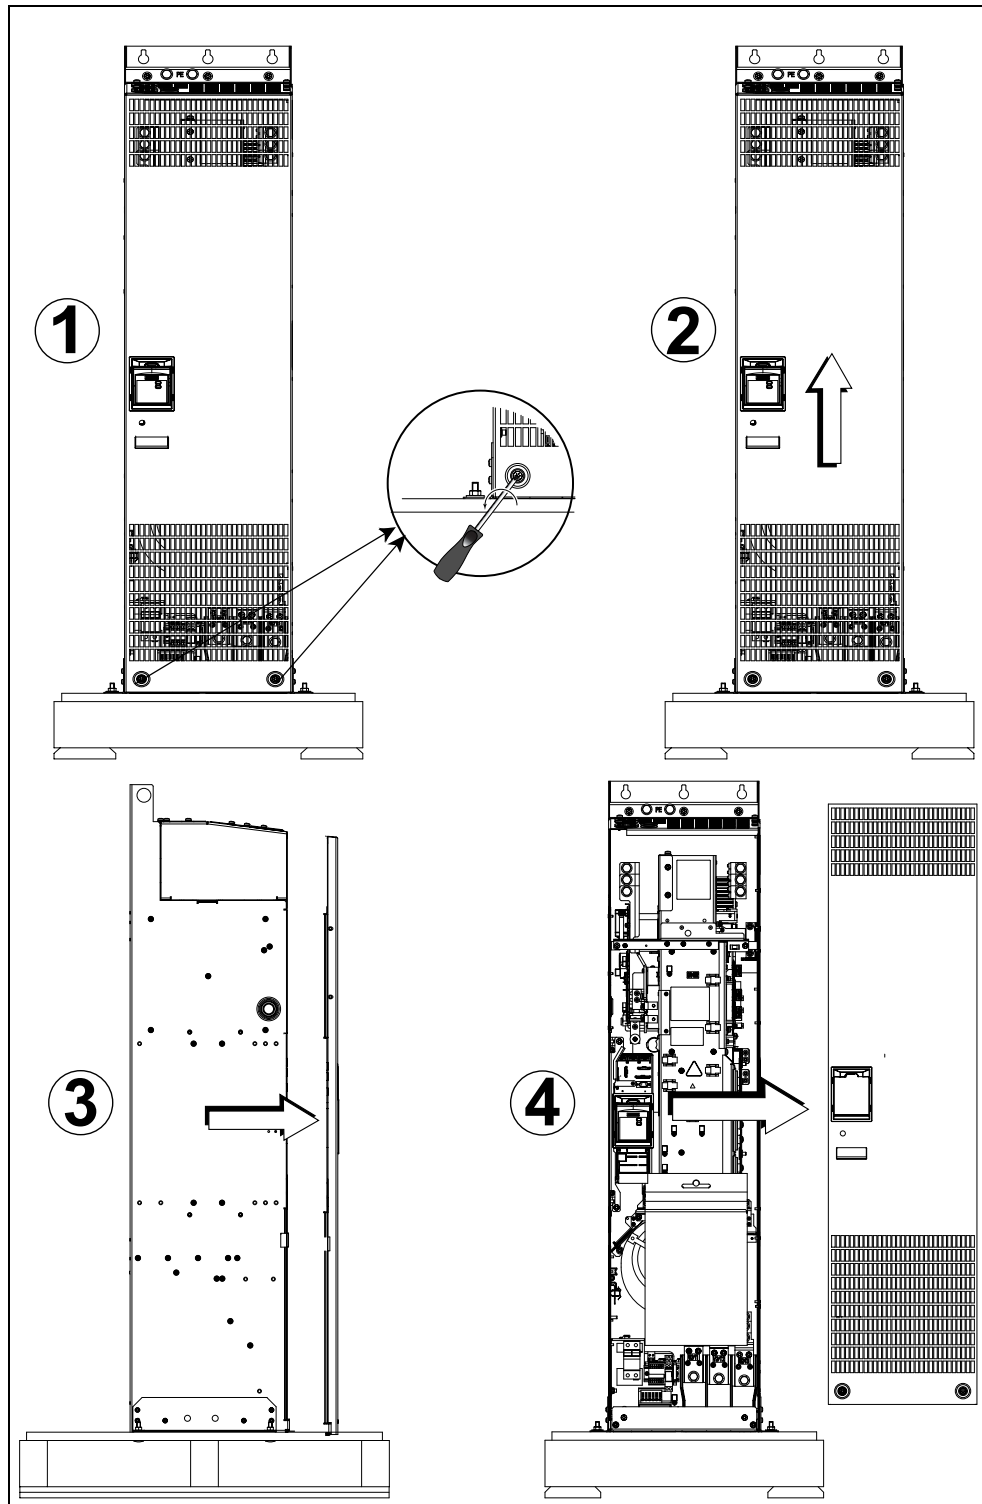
Removing front covers (Frame Sizes FX and GX)
